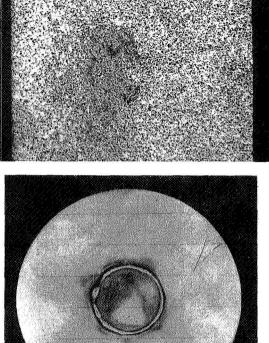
SURFACE APPEARANCE AND MICROSTRUCTURE OF ELECTRON BEAM WELDED 1/4-INCH THICK, 40% POROUS STAINLESS STEEL POWDER PARTS TO WROUGHT SAMPLE HOLDER
